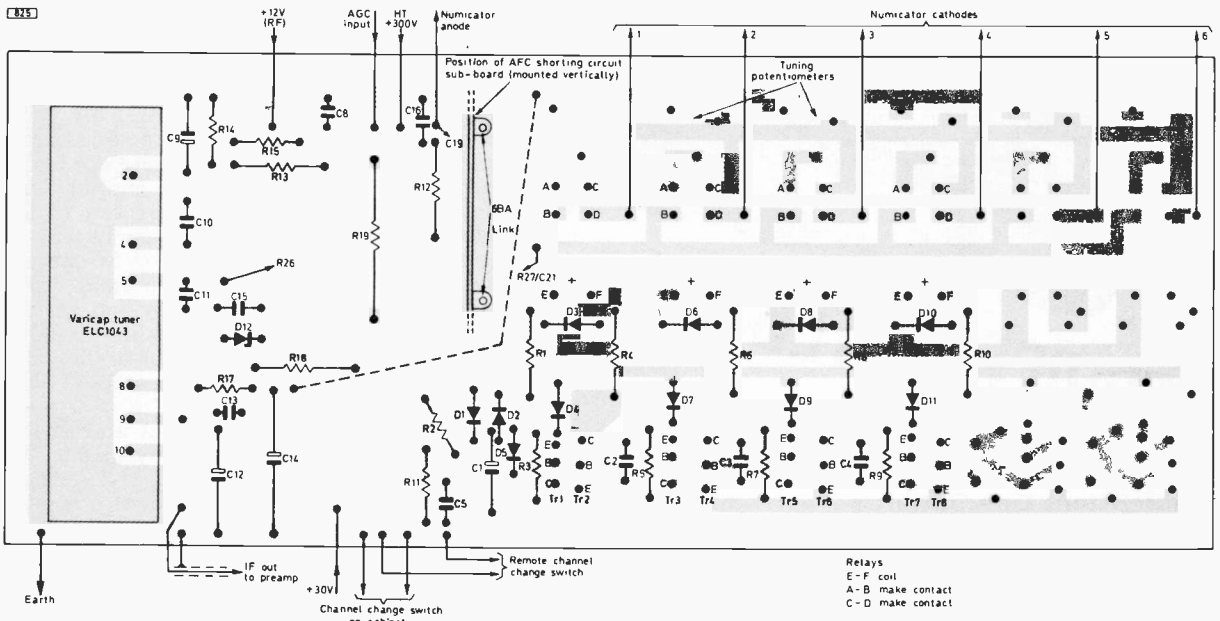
Printed board layout for the circuitry shown in Fig. 1, viewed from the component side. The actual size of the board is $10\frac{3}{8} \times 4\frac{1}{4}$ in. The a.f.c. shorting circuit sub-board is mounted vertically in the position shown using 6BA nuts and bolts and metal brackets.
